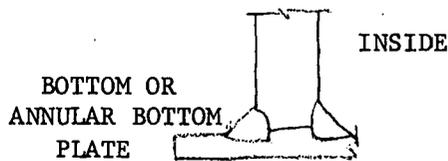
BOTTOM-TO-SHELL JOINT
